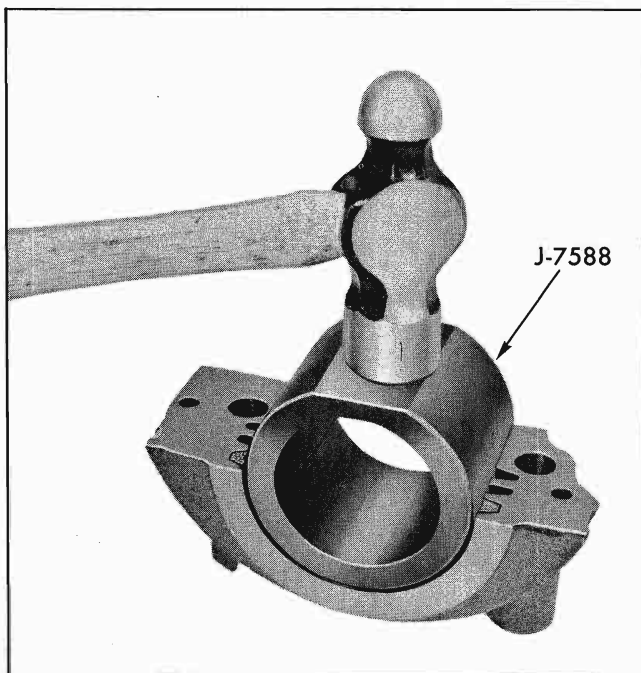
Compressing Upper Seal in Bearing Cap with J-7588
